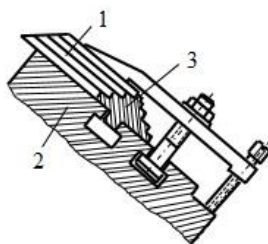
Mounting of knives on the table of a sharpening machine on the step plate:
